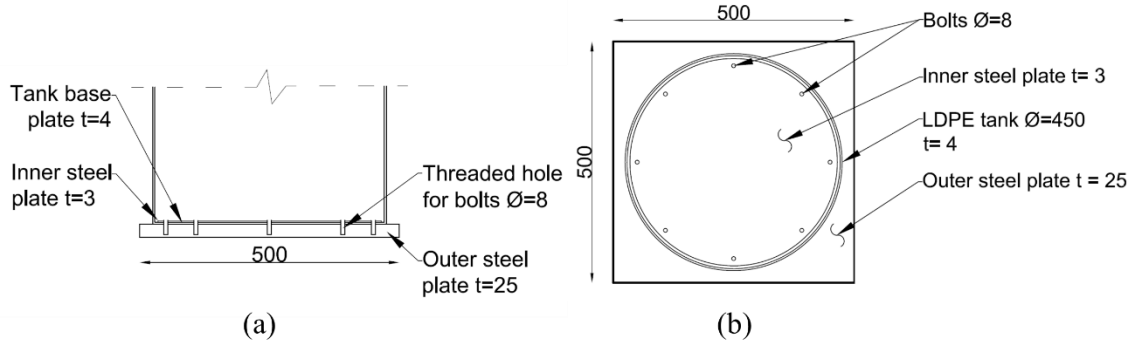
Fixing of LDPE tank base (a) Front view, and (b) top view (units in mm).
